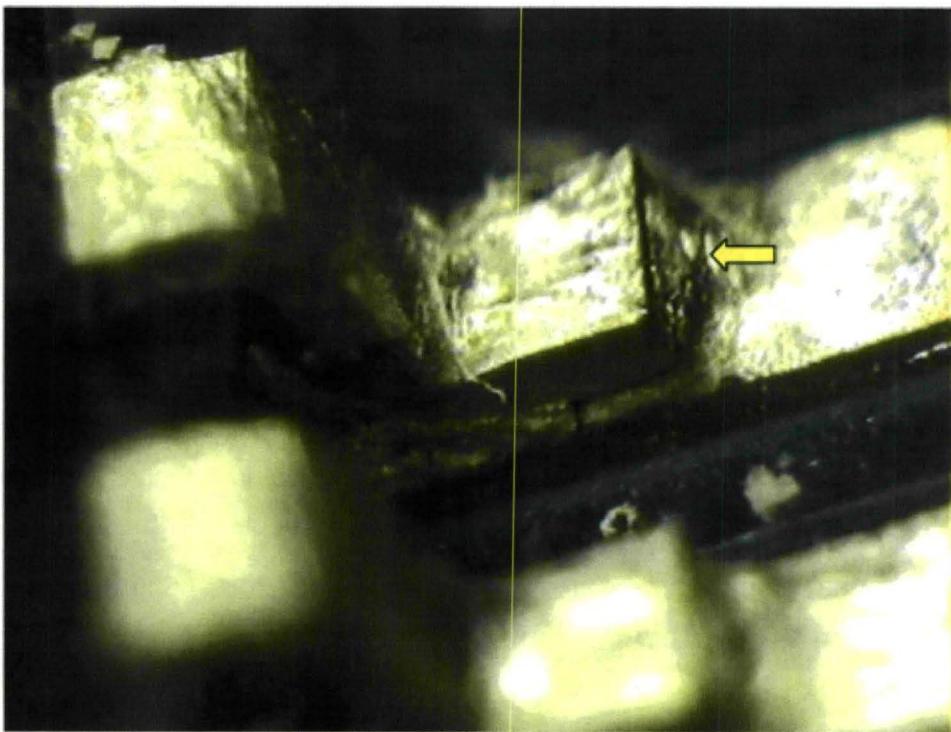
Test Vehicle 34 TSOP U61 (Cracked SnPb/SnPb Solder Joint)
